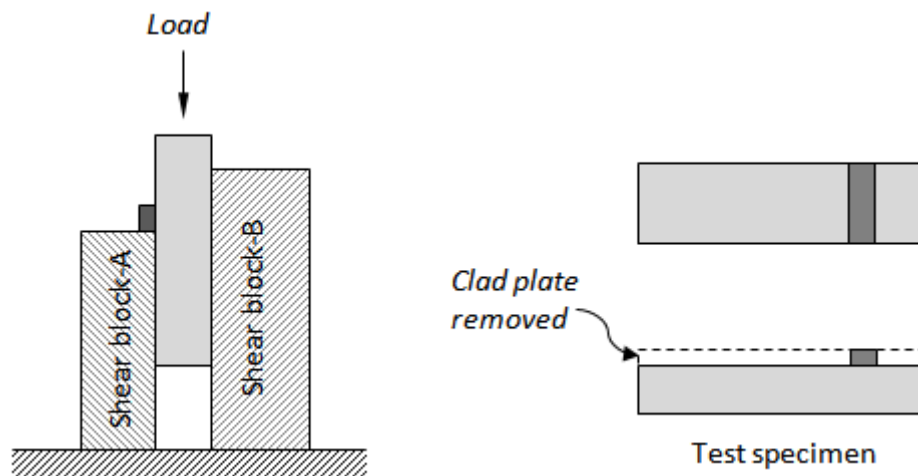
Test specimen and method of making shear test of clad plate (Shear blocks shall be bolted firmly together against filler piece)
